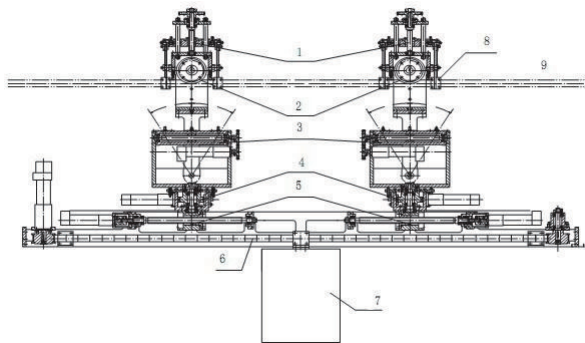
Structure of the inspection robot: 1, the clamping joint. 2, the wheel. 3, the swaying joint. 4, the turning joint. 5, distance adjusting joint. 6, guide rail. 7, counterweight box. 8, claw. 9, power transmission line
